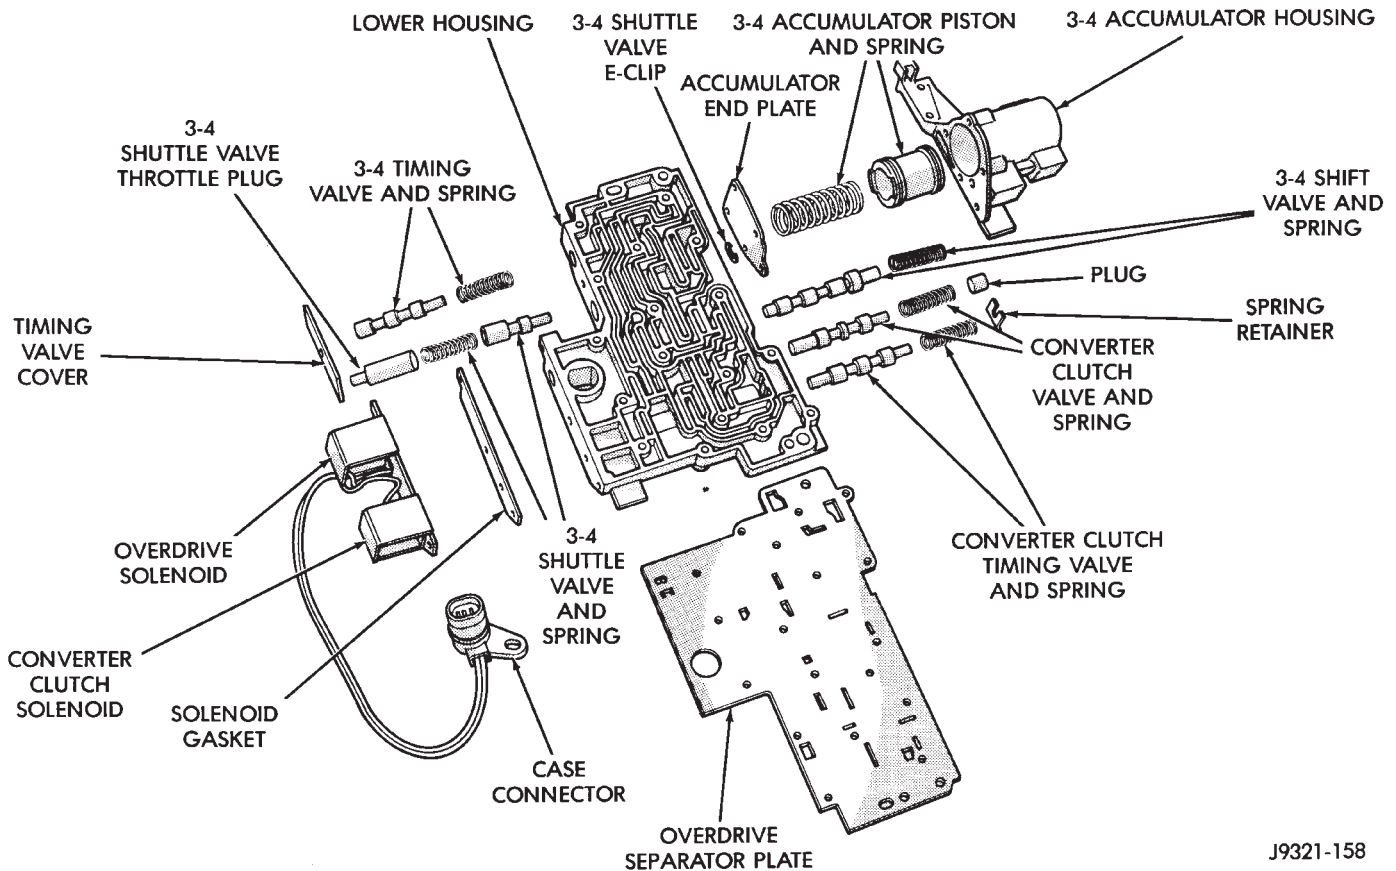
Shift Valves And Springs—46RH Lower Housing
